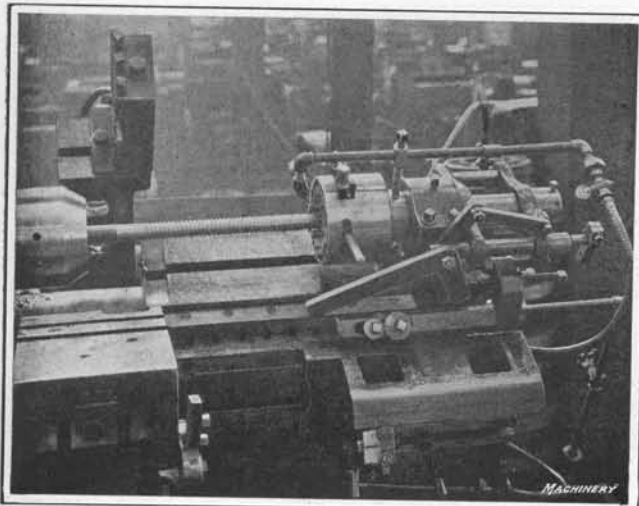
Setting Opening Die with Roll on High Point of Cam
